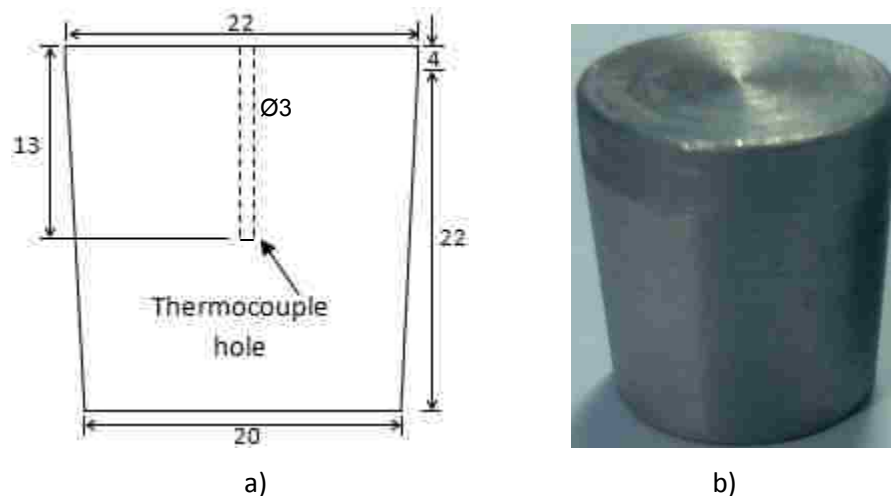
Samples of squeeze cast experiment, a) Plain drawing (dimensions are in mm), b) Picture
